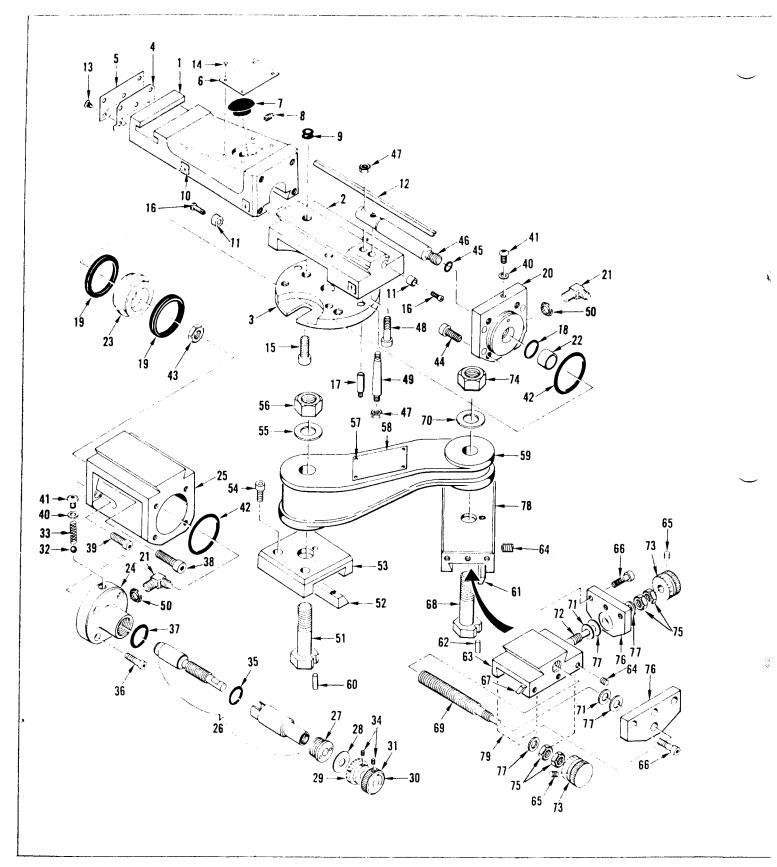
Exploded View of Mark III Series Lathe Tracer Attachment and
